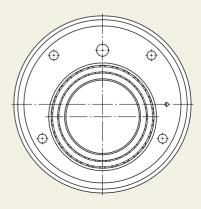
Some printing cylinder bearing units have one or two eccentric intermediate rings, each supported by a double row needle roller and cage assembly
